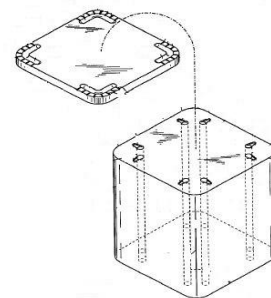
Cutting tool insert having internal microduct for coolant being assembled [11]
